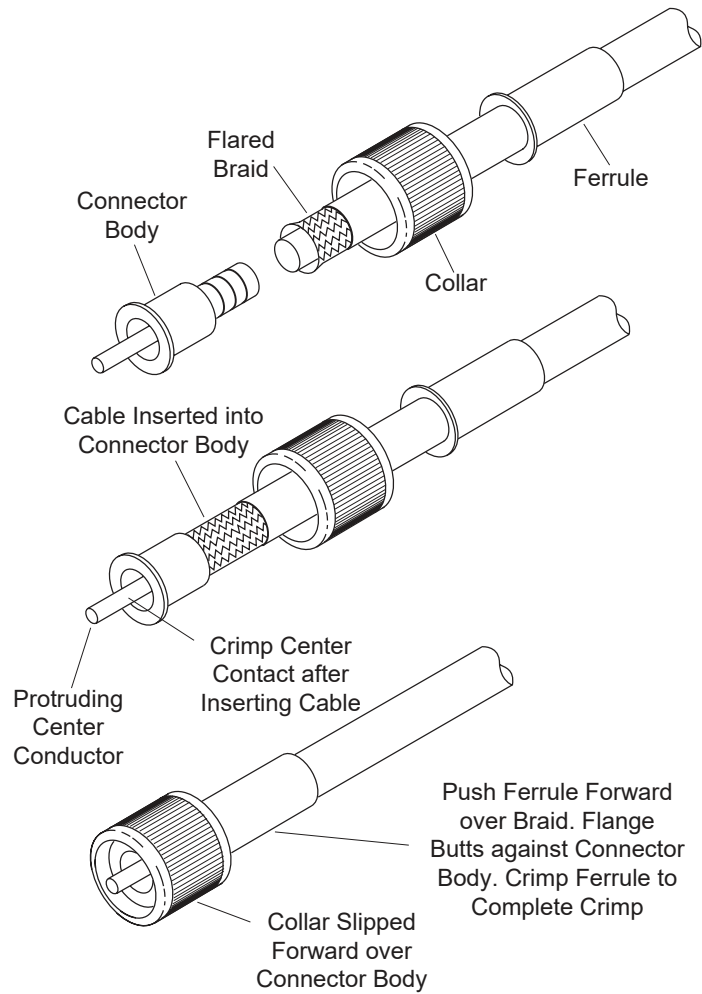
Motorola Solutions Crimping Tool 66-80388A26
